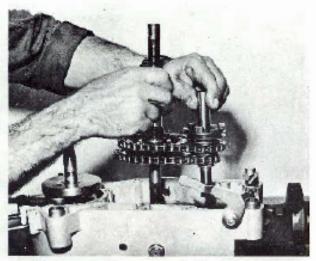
Remove the pedal shaft and the rear drive shaft together.
